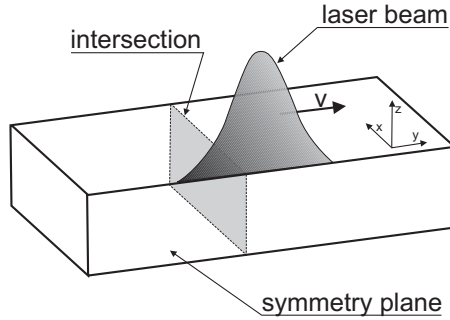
Schematic illustration of the numerical model for laser surface welding process
